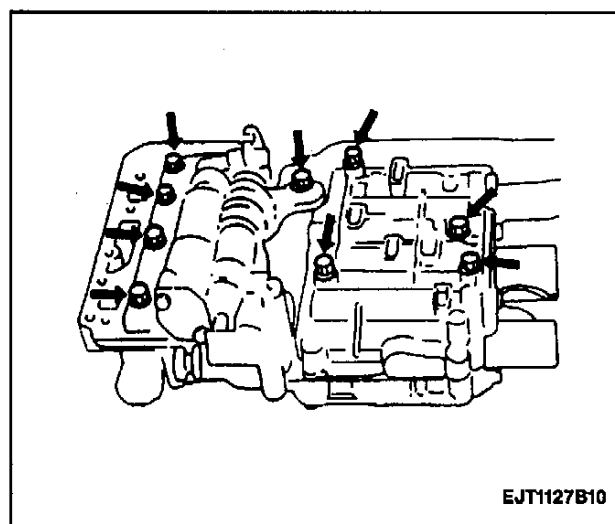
Upper Valve Body Bolt Location (03-72LE, 4-Speed)
